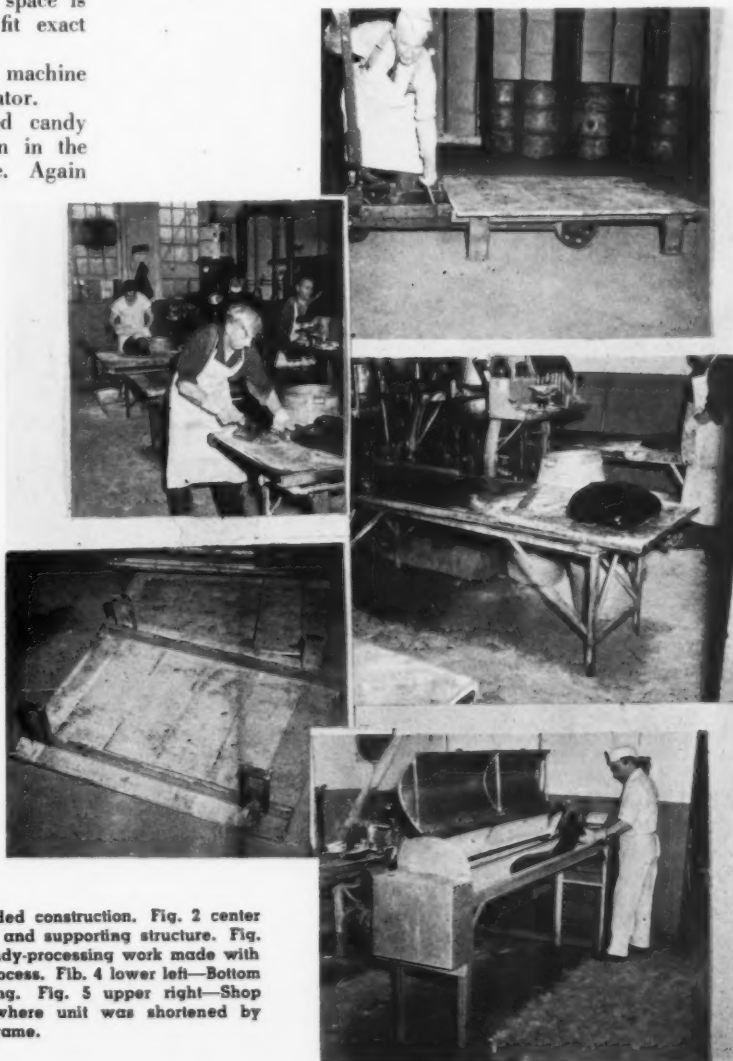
top left—View of batch-working tables of welded construction. Fig. 2 center right—Detail of batch-working table with welded top and supporting structure. Fig. 3 right bottom—Shop-designed machine for special candy-processing work made with a minimum of time and materials by the electric arc process. Fig. 4 lower left—Bottom view of welded skid platform for materials handling. Fig. 5 upper right—Shop worker points out welded joint of shipping dolly where unit was shortened by cutting and welding main frame.
